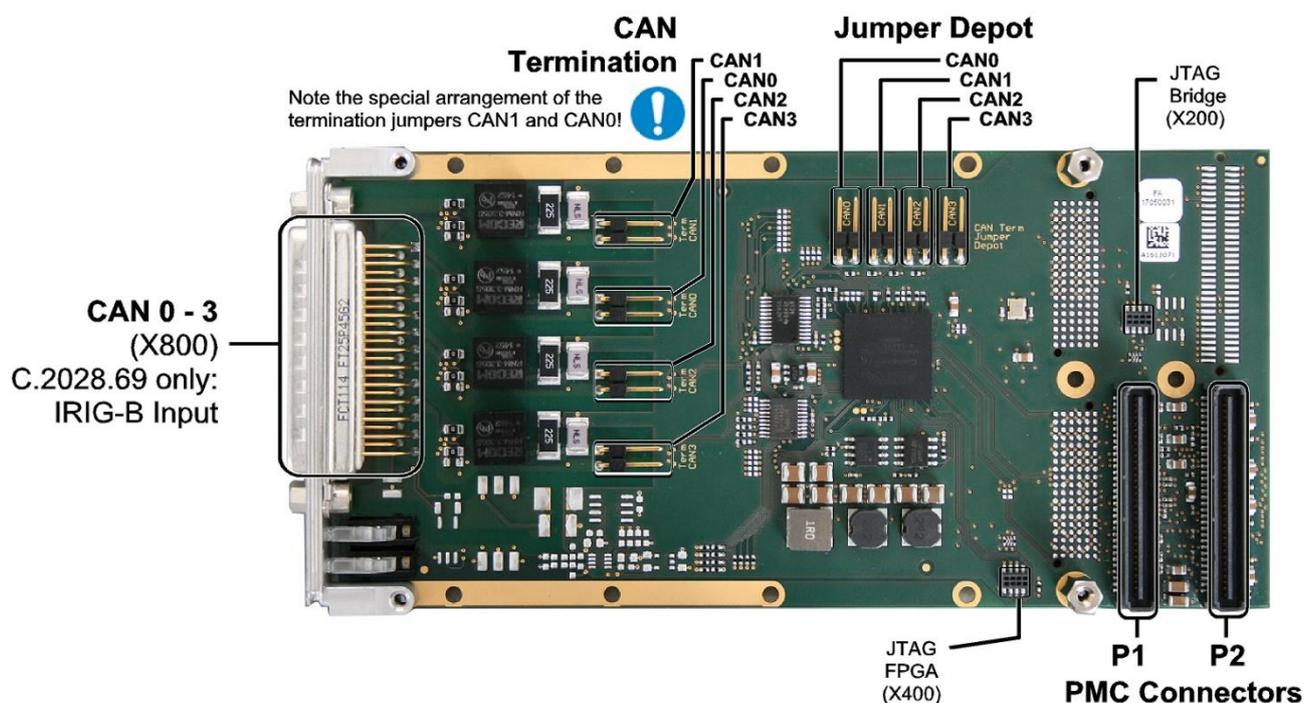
PCB top layer of PMC-CAN/402-4-FD (facing the carrier board)
